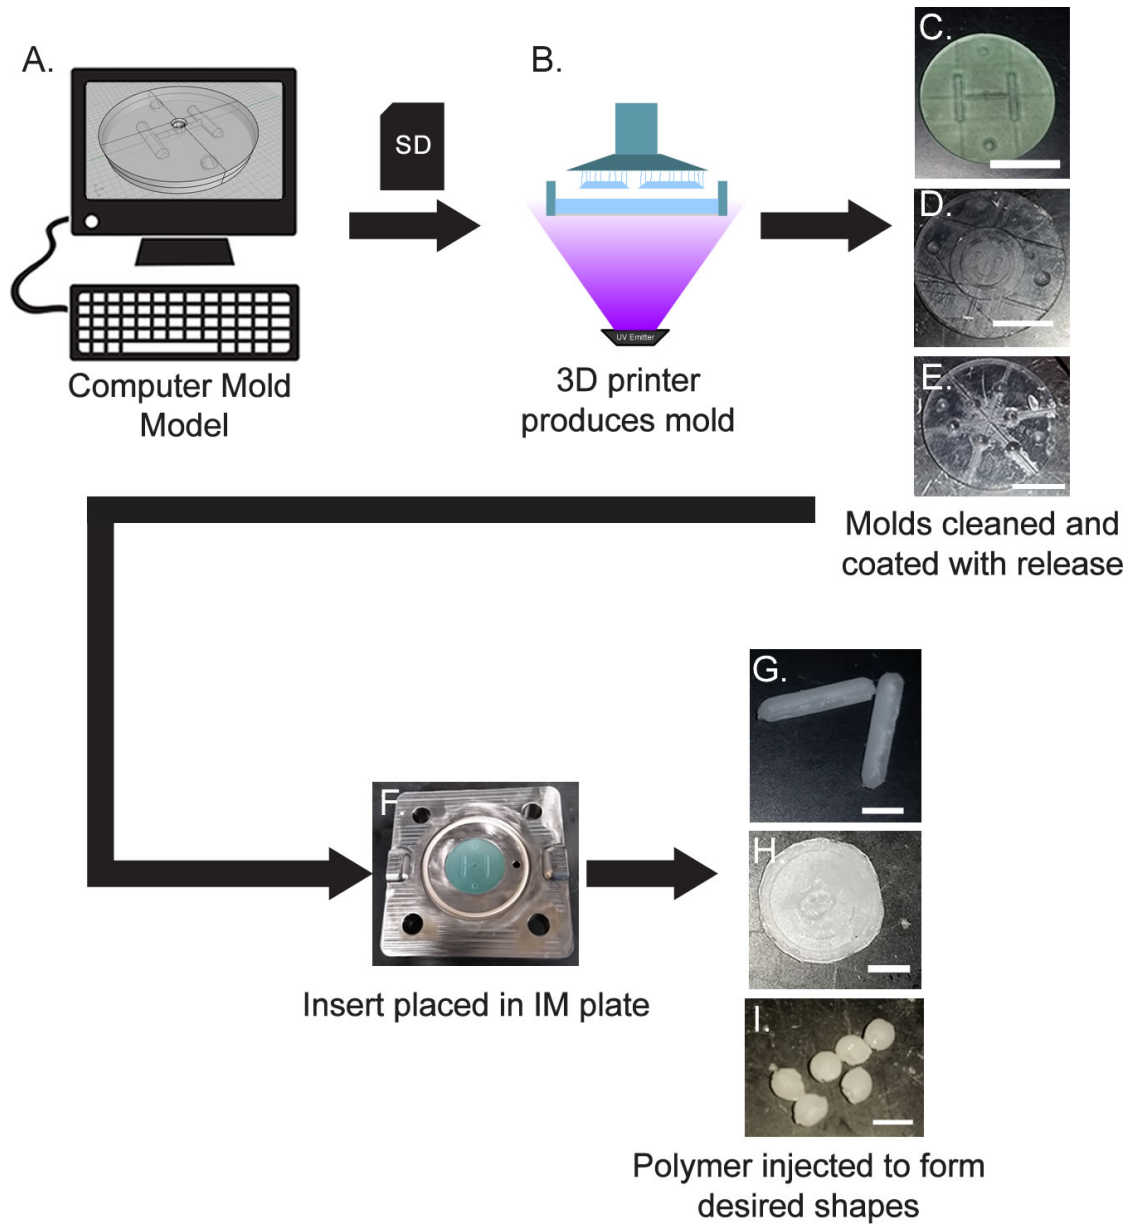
Procedure for forming insert injection molds for implants, scaffolds and other arbitrary shapes with millimeter-scale features. A) Mold is drawn on CAD and exported to as STL, B) resin 3D printer produces insert molds, C/D/E) molds are removed from printer, cleaned and coated with silicone mold release, F) placed in the machined IM plate, then G/H/I) injected with molten polymer and the resultant structures demolded. Scale bars: C,D,E: 10 mm, G,H,I: 3 mm.
